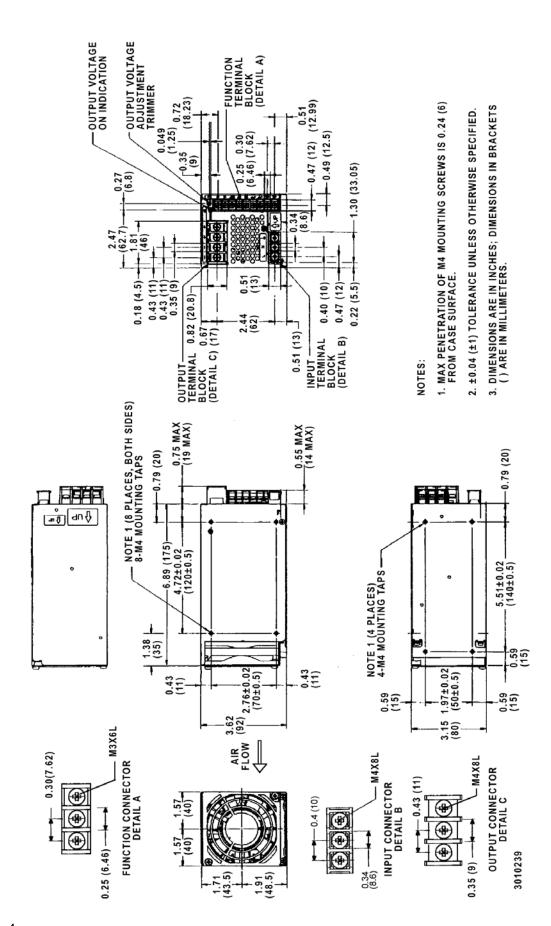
MECHANICAL OUTLINE DRAWING OF THE RKW 300W POWER SUPPLY
